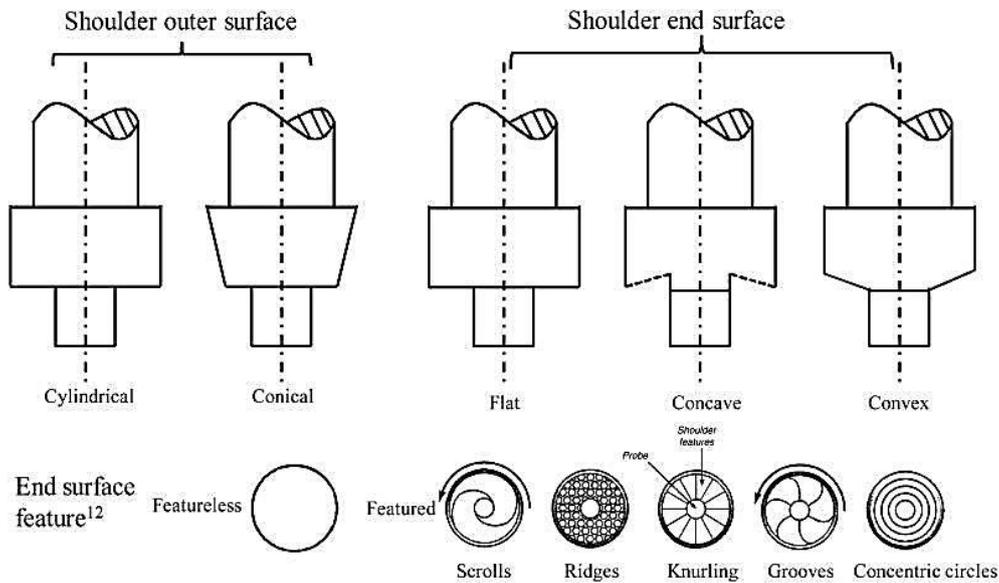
Design of Tool shoulder used in Friction Stir Welding
